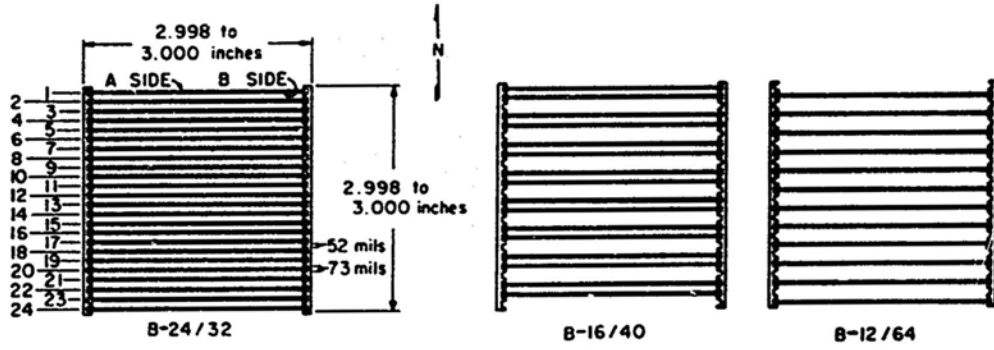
Top View of Type-B Fuel Assemblies with 24-, 16-, and 12-plate Loadings (Ref. A-11)
